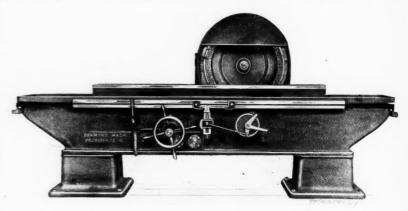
Face Grinder for Finishing Guide Bars and General Work
